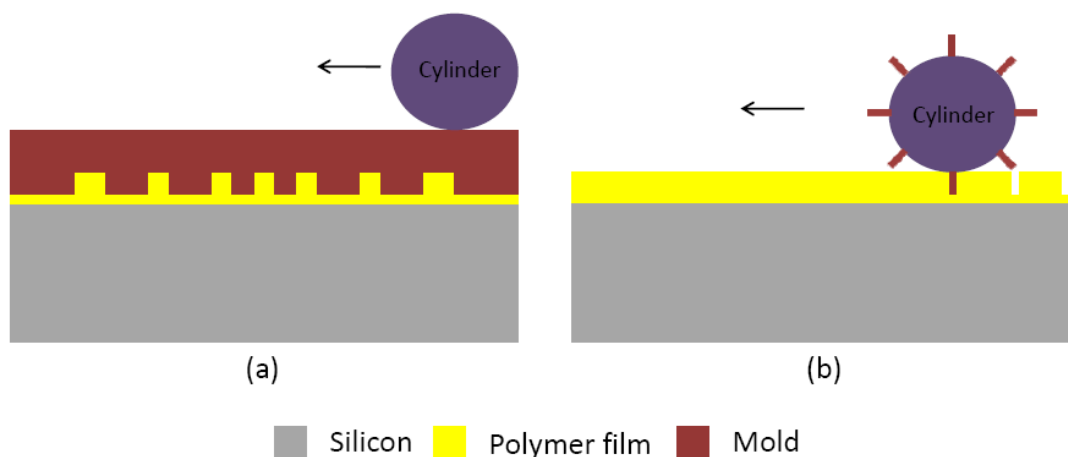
(a) Flat mold with cylindrical roller on top; (b) Cylindrical mold roller imprint technique.
